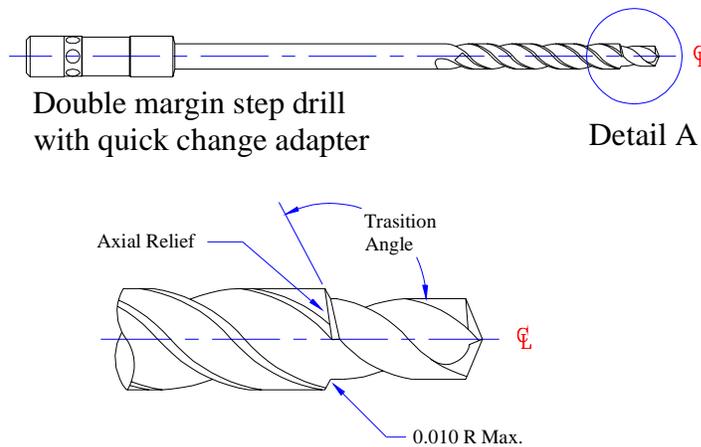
Typical Aircraft Drill, for Pre-drilling Fastener Holes.
